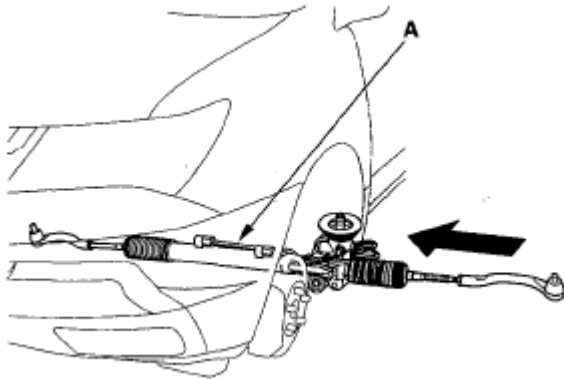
Identifying Steering Gearbox Between Front Subframe And Body From Driver'S Side
